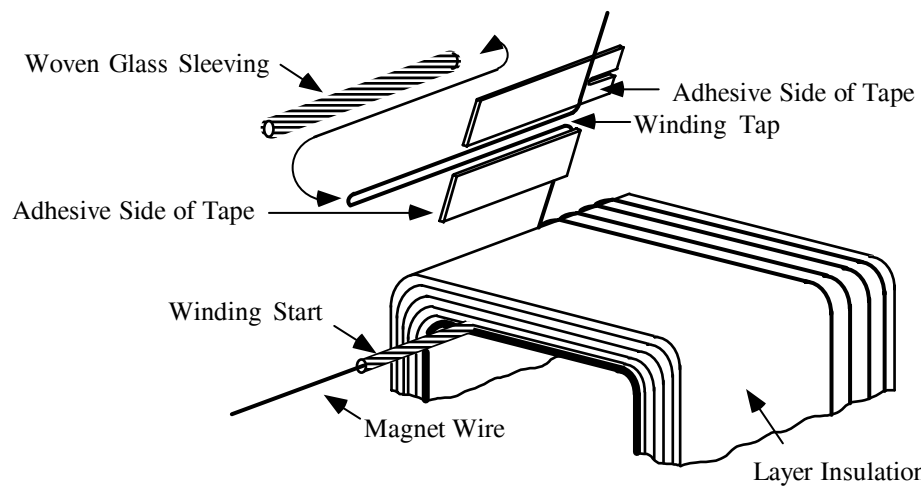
Tap Lead: Step 1, Showing the Exploded View, Using Sleeving.
